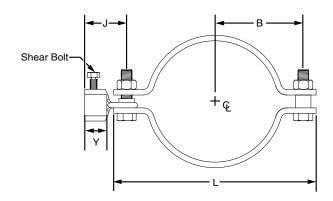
WEIGHT (LBS) • DIMENSIONS (IN)
